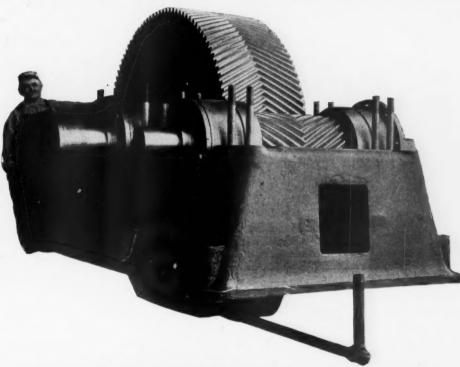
Rolling-mill type of herringbone reducer, equipped with roller bearings—300 to 500 hp.
